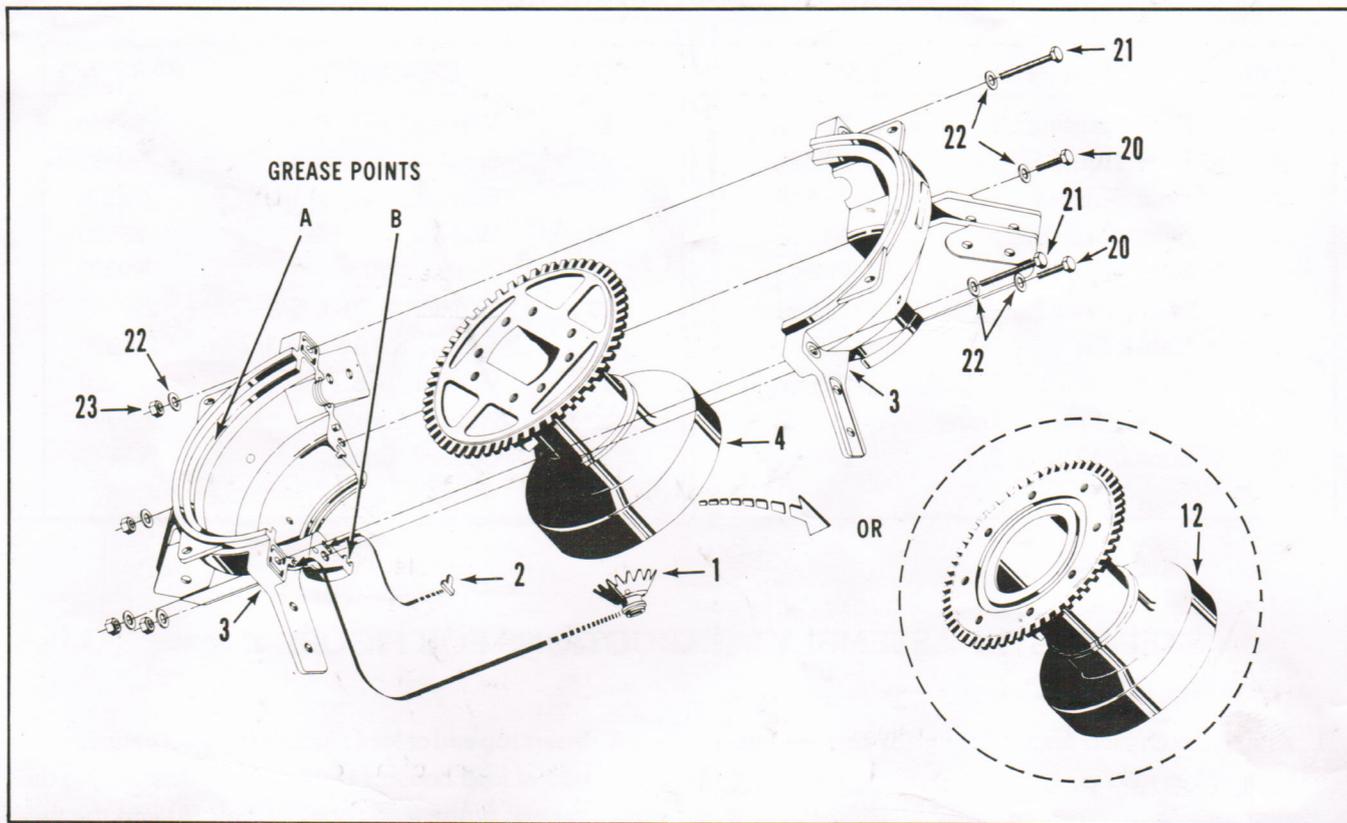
Feed Housing Assembly For Single or Dual Polarization Feed
